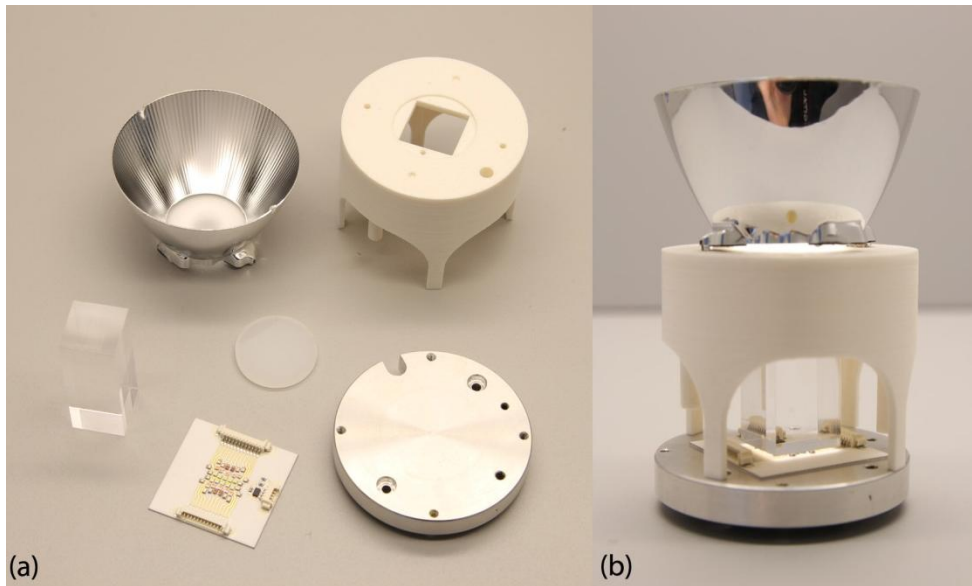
Finalised spectrally tuneable LED light engine. (a) components, including a 3D-printed optics holder and CNC-machined aluminium heat spreader and assembled light engine with LEDIL reflector (b).
